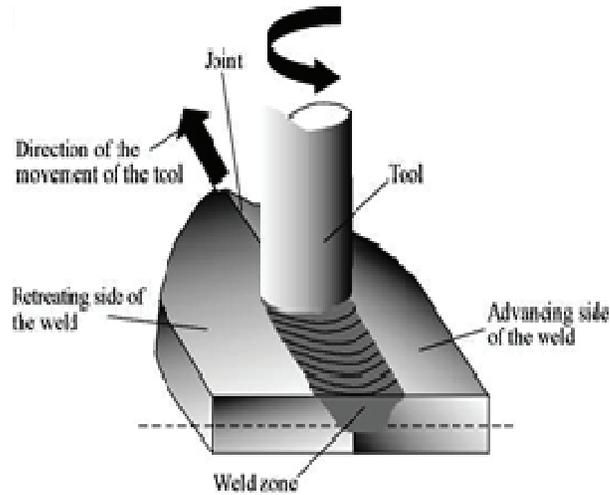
The progress of the tool through the joint, also showing the weld zone
